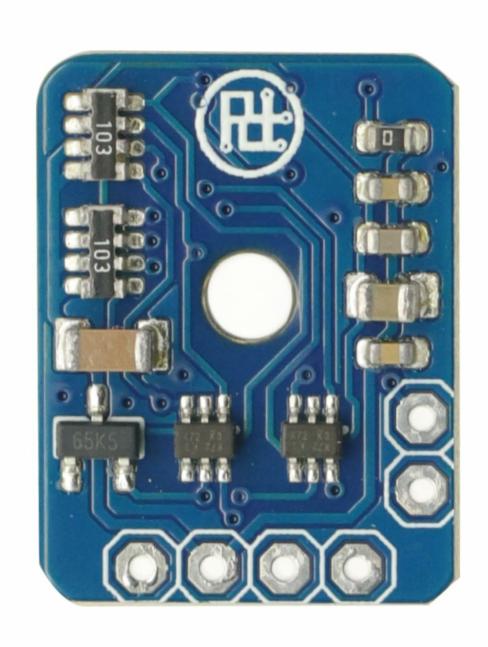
Detailed top view of the AS7341 Sensor Module, highlighting the integrated circuits and components.
